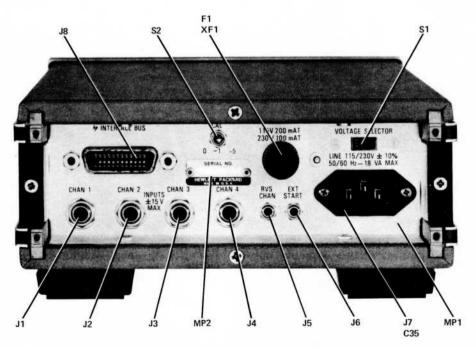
Component Locations, Rear Panel Assembly A1A2
